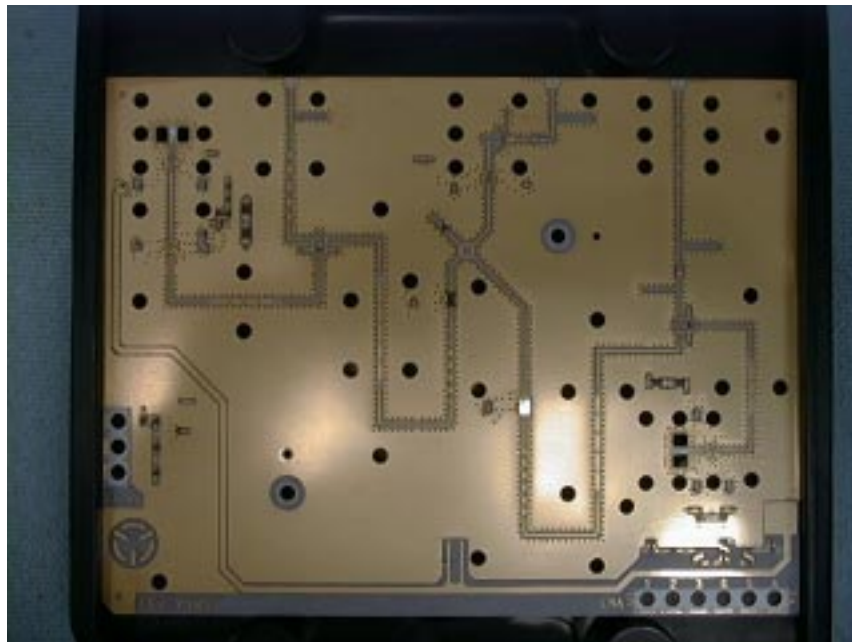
Millimeter Wave Assembly components are primarily MMICS (Monolithic Microwave Integrated Circuits) that are wire-bonded to a 4-layer RF micro-strip circuit board. In this view, the MMICS are almost indistinguishable.
